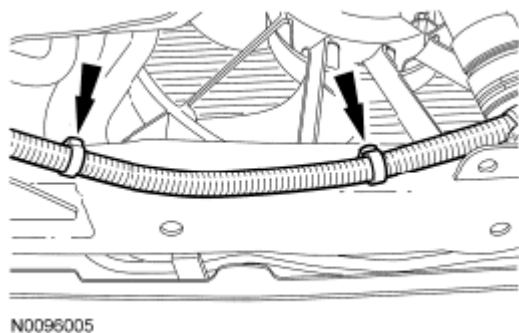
Locating EPAS System Wiring Harness Pin-Type Retainers
